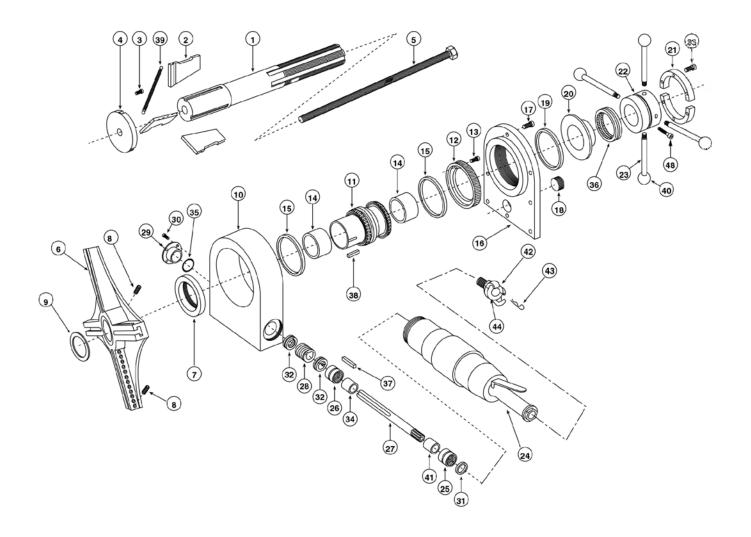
PB8 POWER BEVELER, PNEUMATIC ASSEMBLY (P/N PB8PN)
